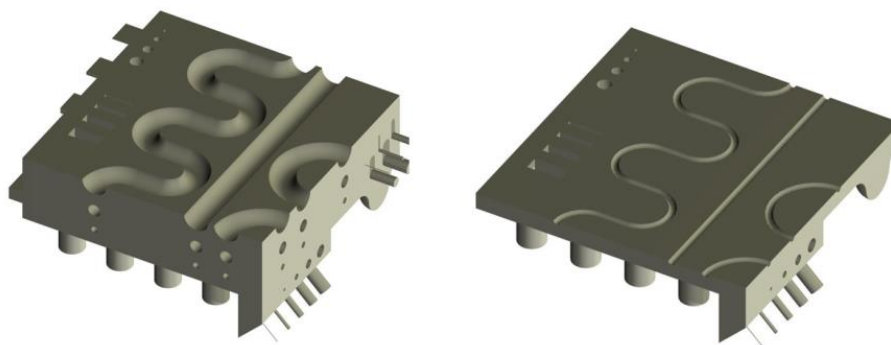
Horizontal cut of the demonstrator highlighting the internal channels.
